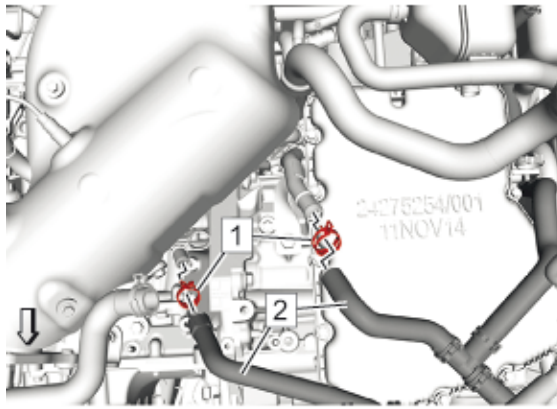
Heater Water Auxiliary Pump Inlet Hoses And Clamps
